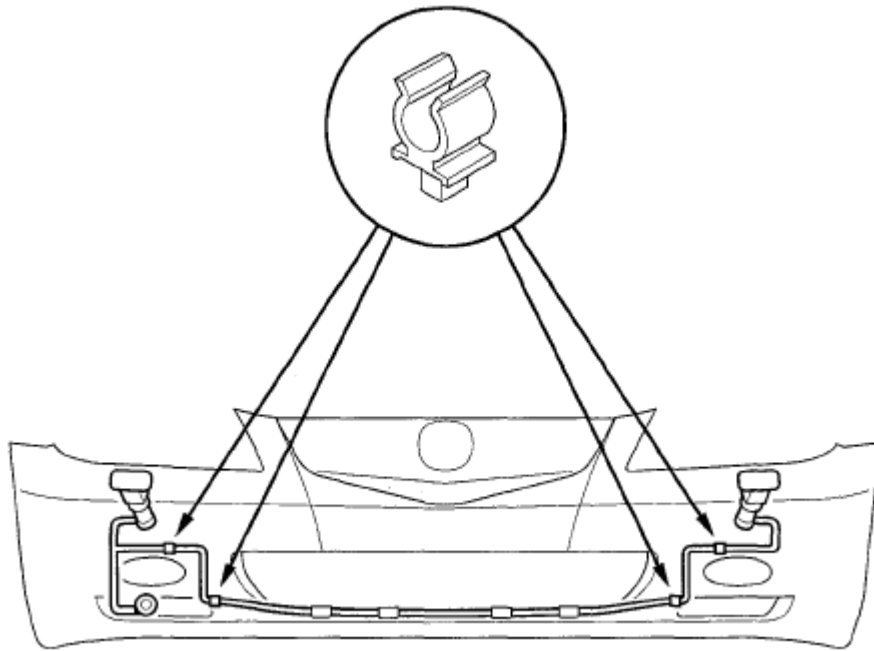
Identifying Washer Nozzles, Tube And Mounting Bolts
